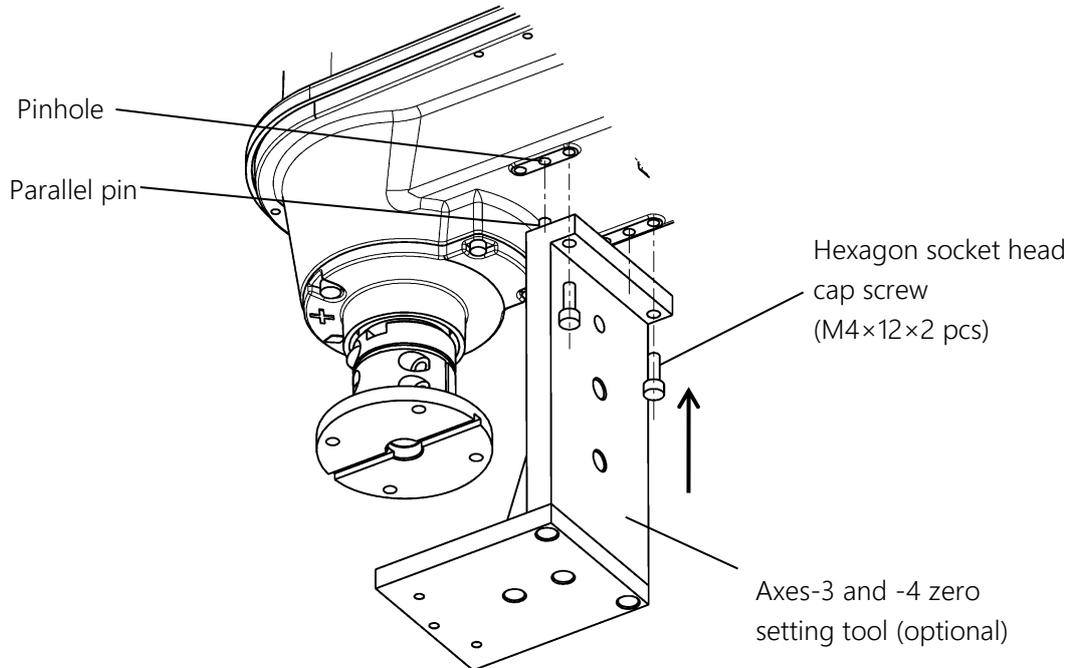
Secure the Axes-3 and -4 Zero Setting Tool
